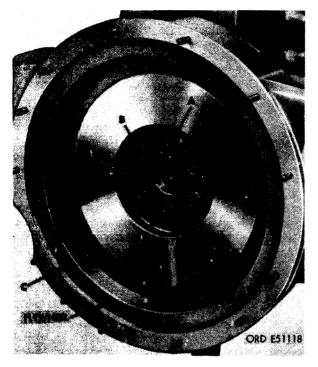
REMOVING OR INSTALLING FLYWHEEL.
